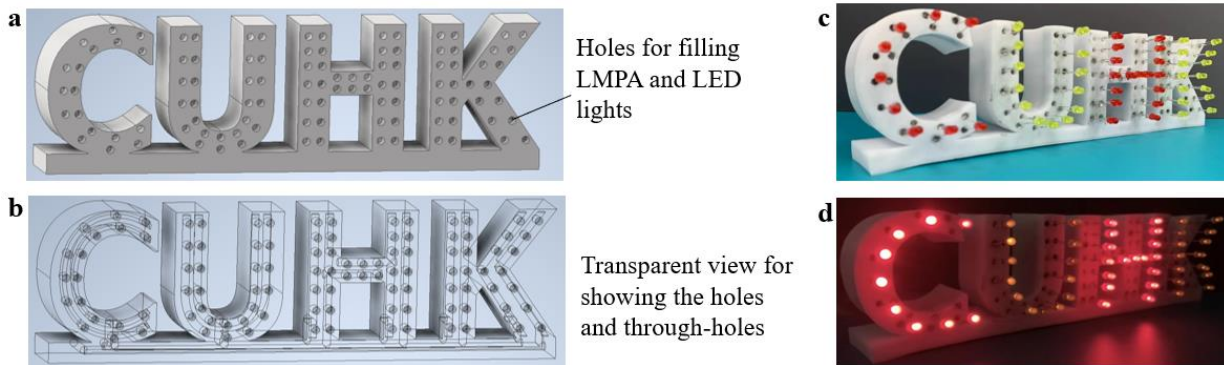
(a, b) Designed CUHK piece and its transparent view; (c) Fabricated CUHK piece; (d) Fabricated CUHK piece with LED lights turned on.
